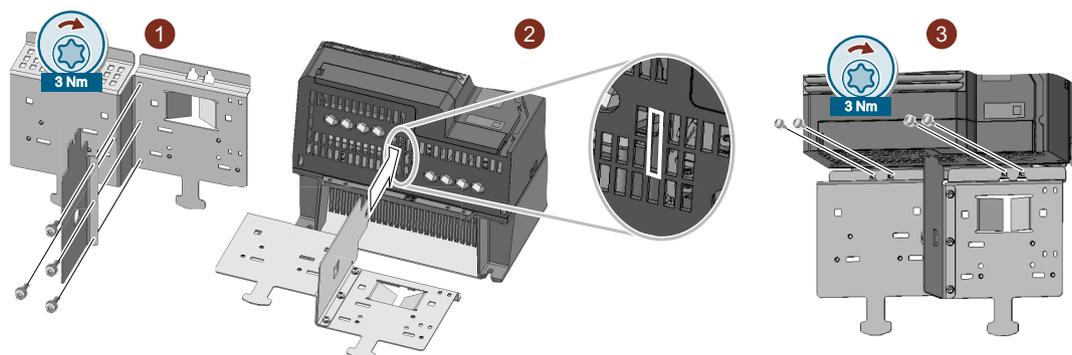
Mounting the shield plates, FSAA ... FSC
